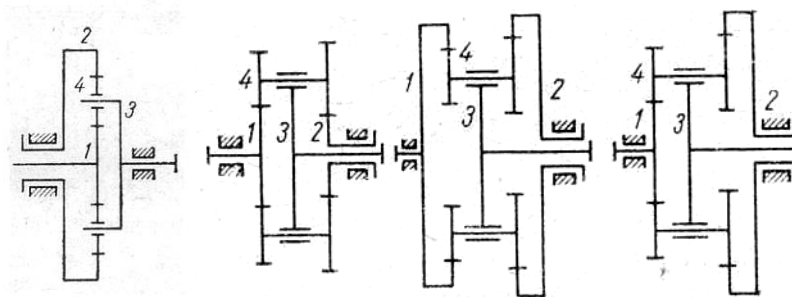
Planetary gearing schemes: sun gear 1, ring gear or *annulus* 2, carrier 3, planet gears 4
